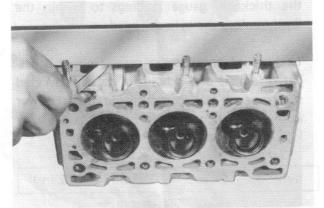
Checking exhaust manifold seating face for flatness.
